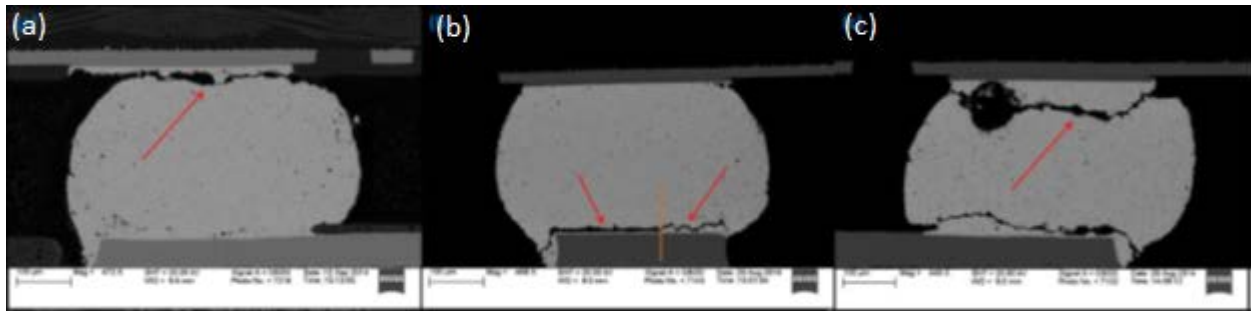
Types of failure modes in BGA packages [1]
